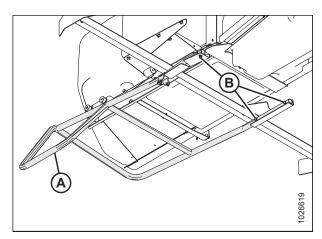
Handrail under Fuel Tank Shipping Assembly
